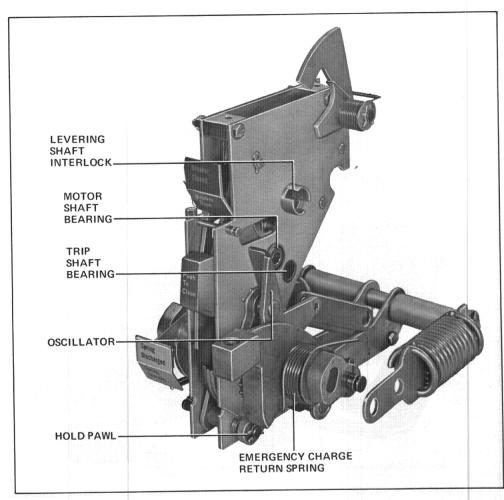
Front View of Mechanism (Power-Operated Spring-Charge)
